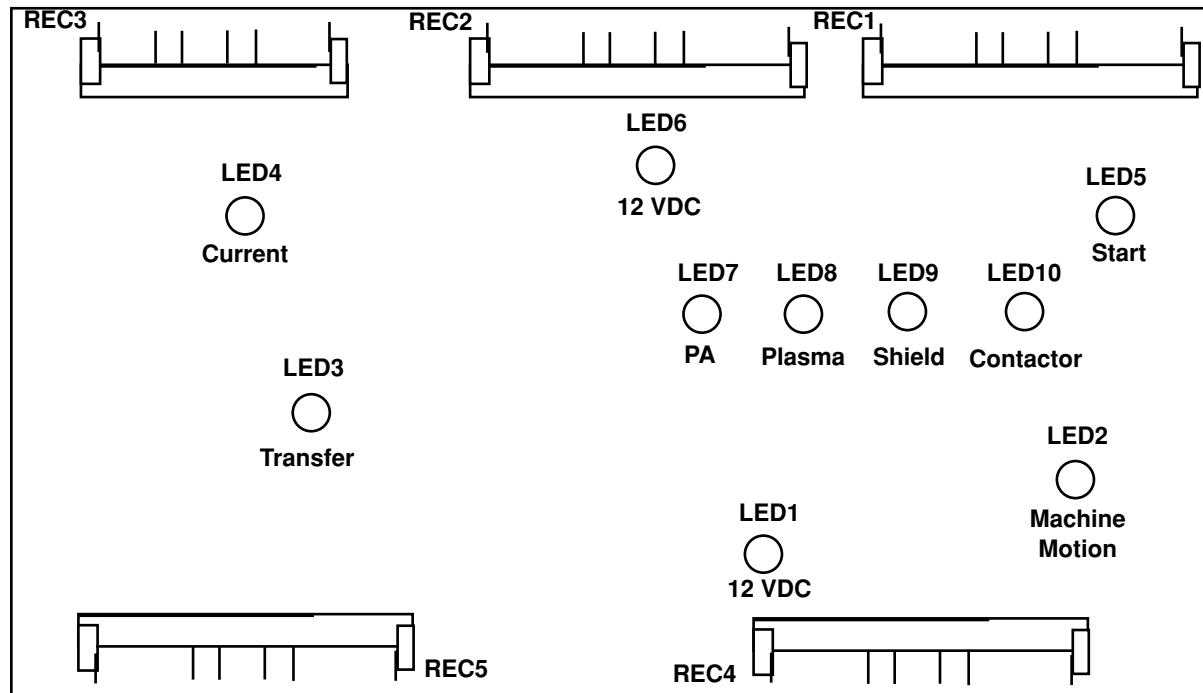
ArcWriter Control PCB A1 Assembly LED Locations
